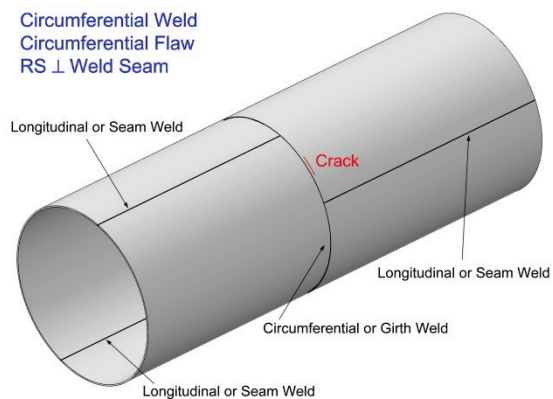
Case 3: Circumferential Crack Parallel to a Circumferential Weld - Residual Stress Perpendicular to the Circumferential Weld with a Double-V Notch
